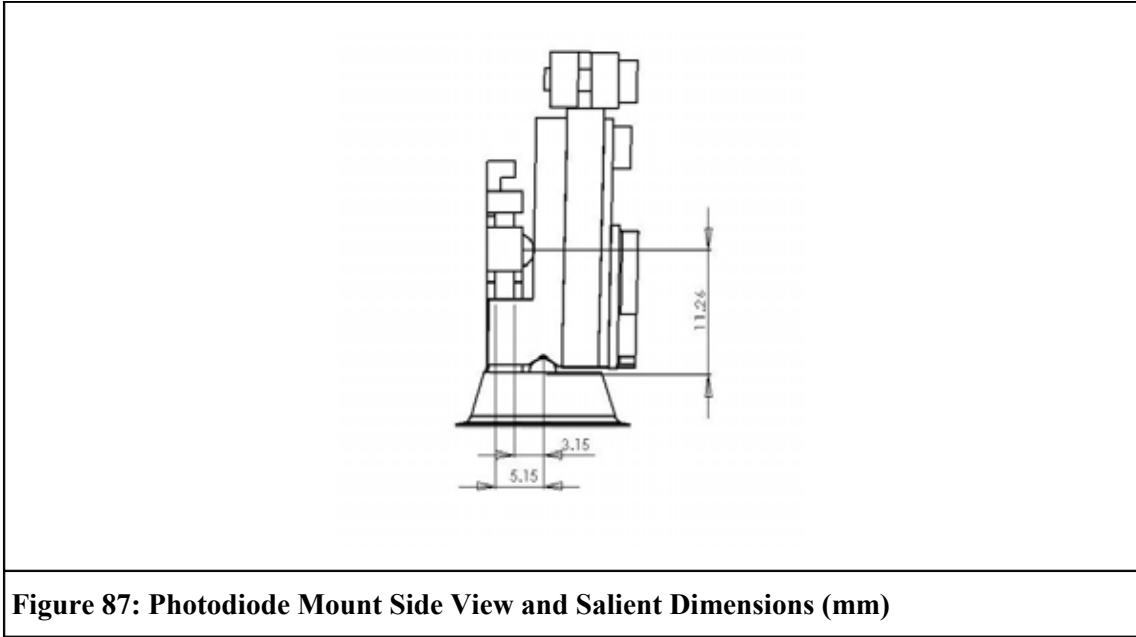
Photodiode Mount Side View and Salient Dimensions (mm)
